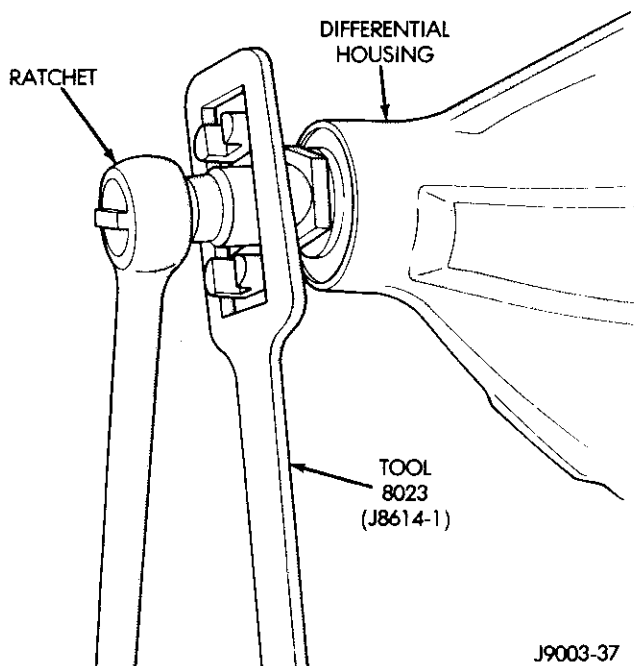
Pinion Gear Shaft Nut Removal/Installation
